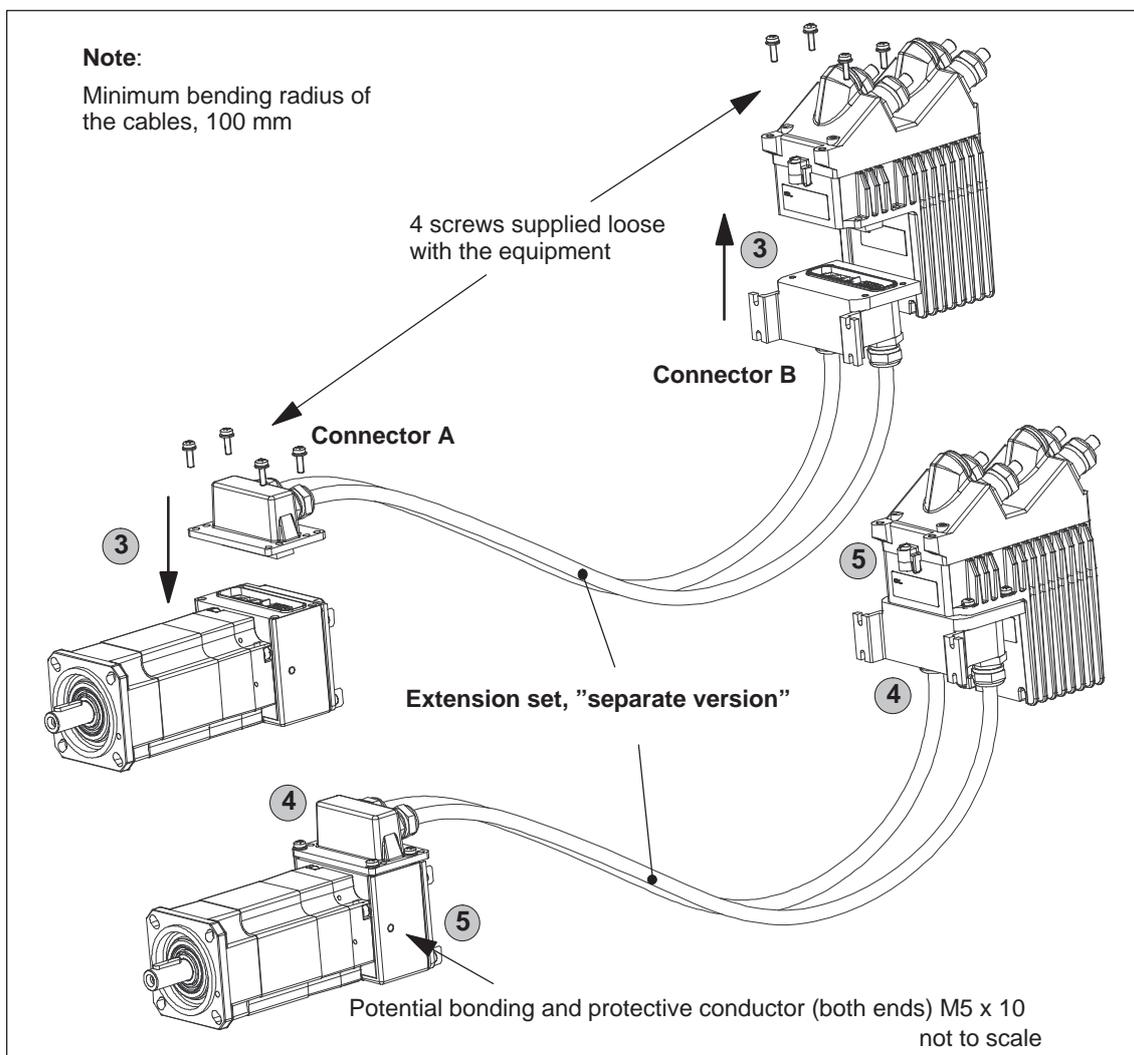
Mounting the extension set "separate version" POSMO A – 300 W
